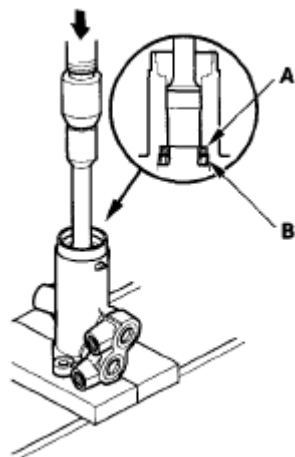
Identifying Valve Oil Seal And Bushing Out Of Valve Housing
